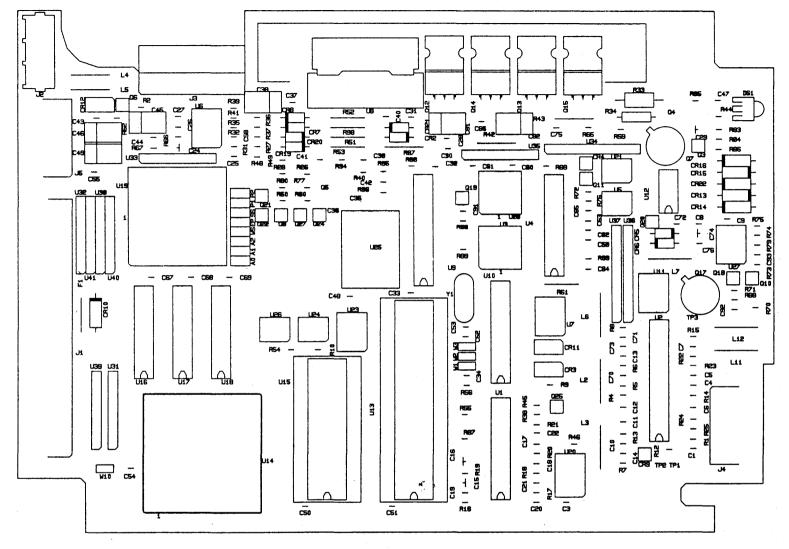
Printed Circuit Board Parts Locations (PCB-7) Figure 3-2: Schematic, PCB-7, Sheet 1 Figure 3-3: Schematic, PCB-7, Sheet 2 Figure 3-4: Schematic, PCB-7, Sheet 3
